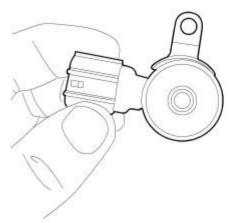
Solenoid Mounting Tab 1/2 Courtesy of CHRYSLER GROUP, LLC
